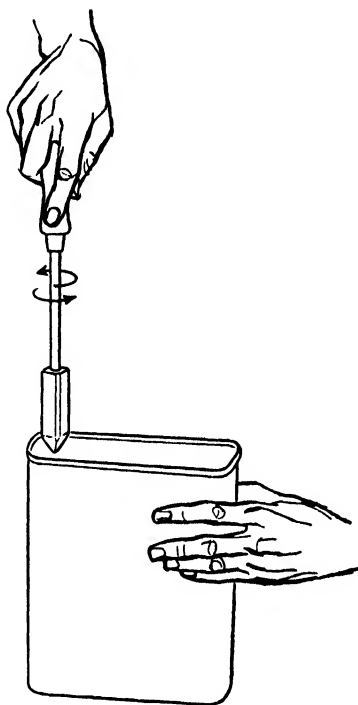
A small hole may be soldered by cleaning and fluxing and then rotating a well-tinned, hot iron back and forth slowly with the point in the hole.
